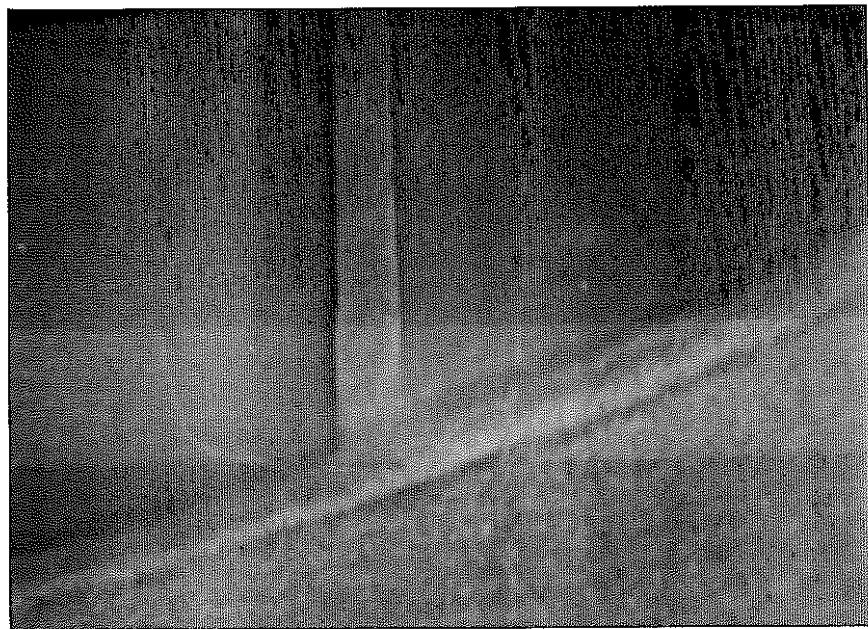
Weld No. PW-2A, 3A
